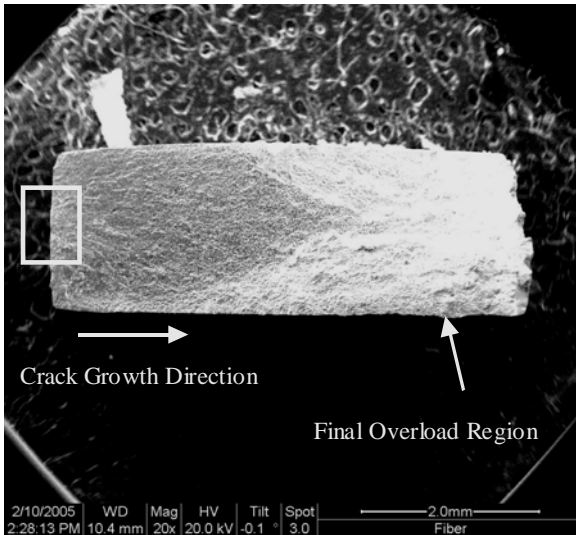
Specimen Ti-06, overall view of fracture surface
